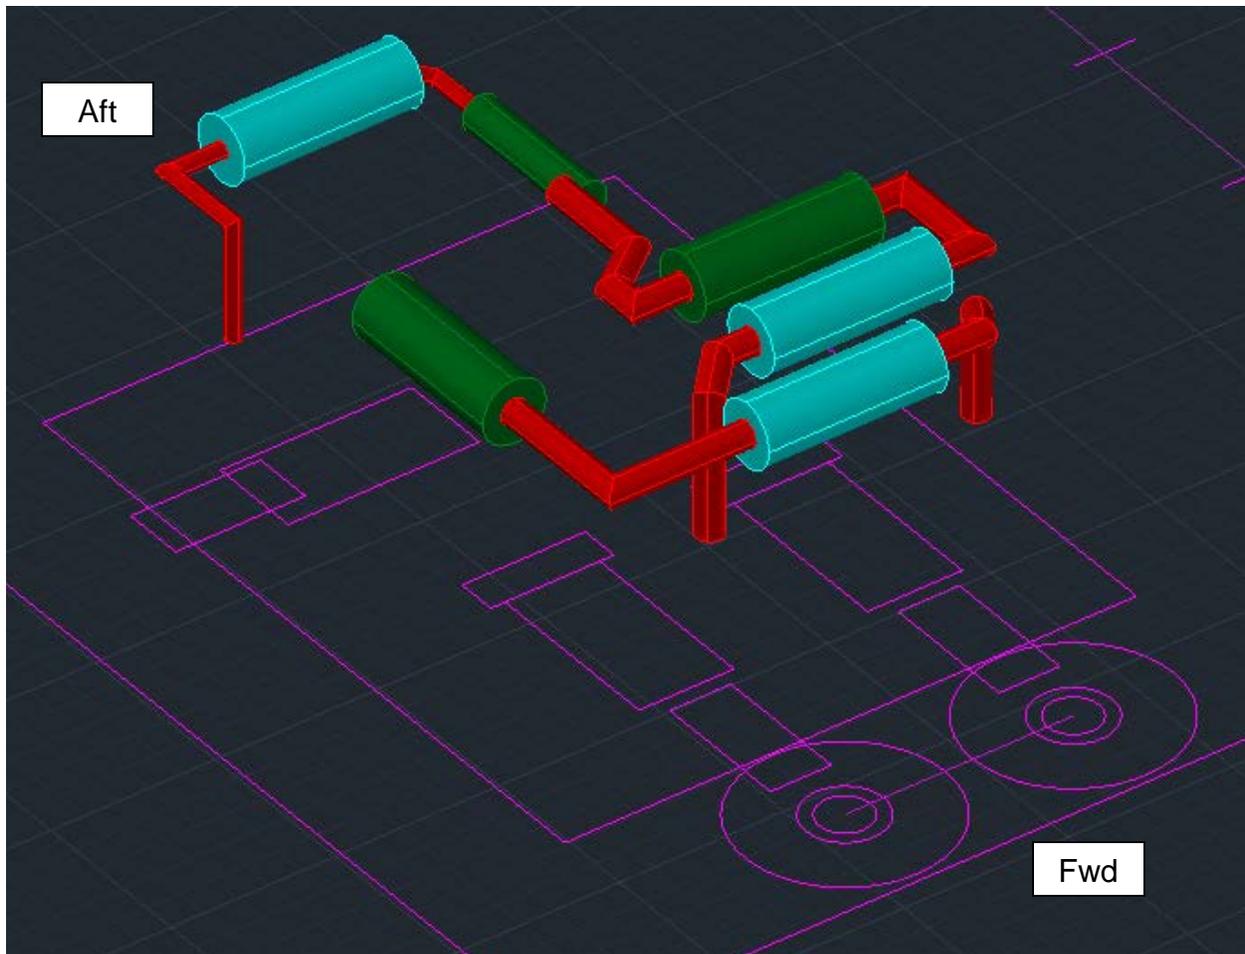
Barge Stbd Engine Room Retrofit Arrangement with Point Cloud Suppressed
